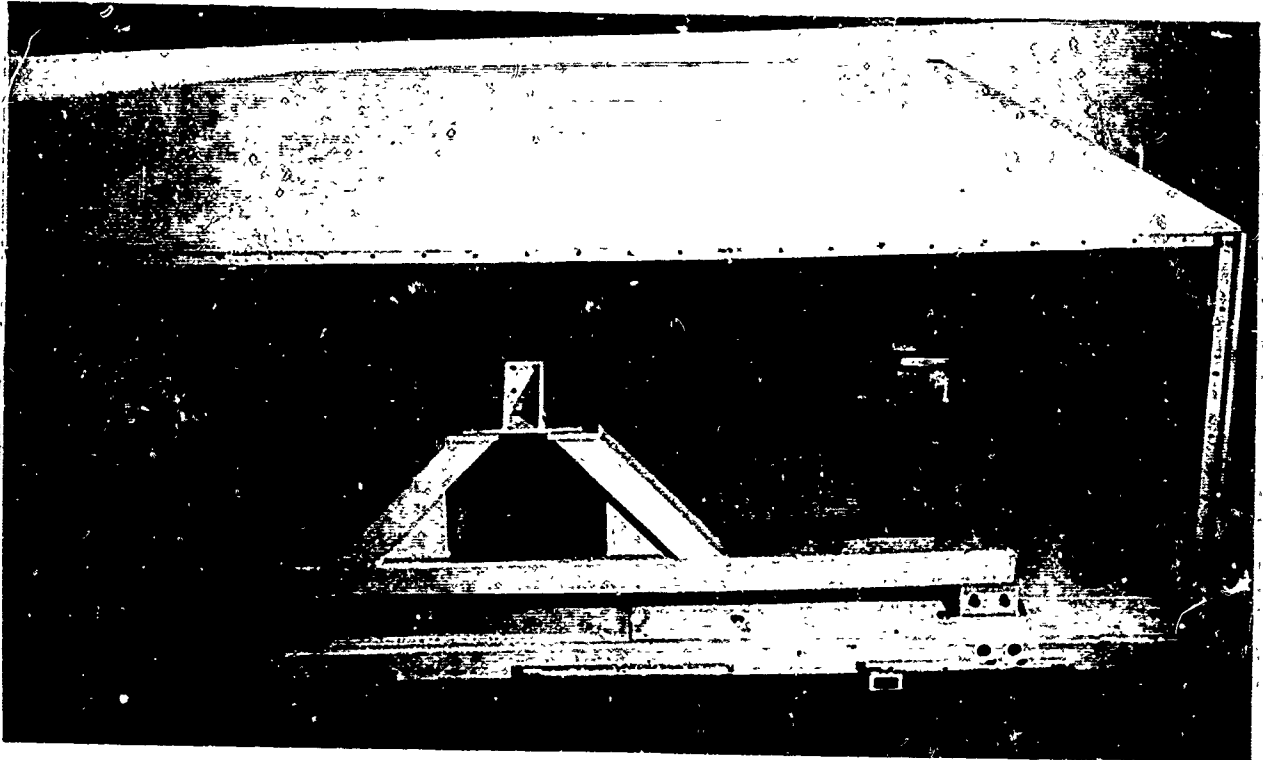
LIFT FAN SHIPPING CONTAINER
